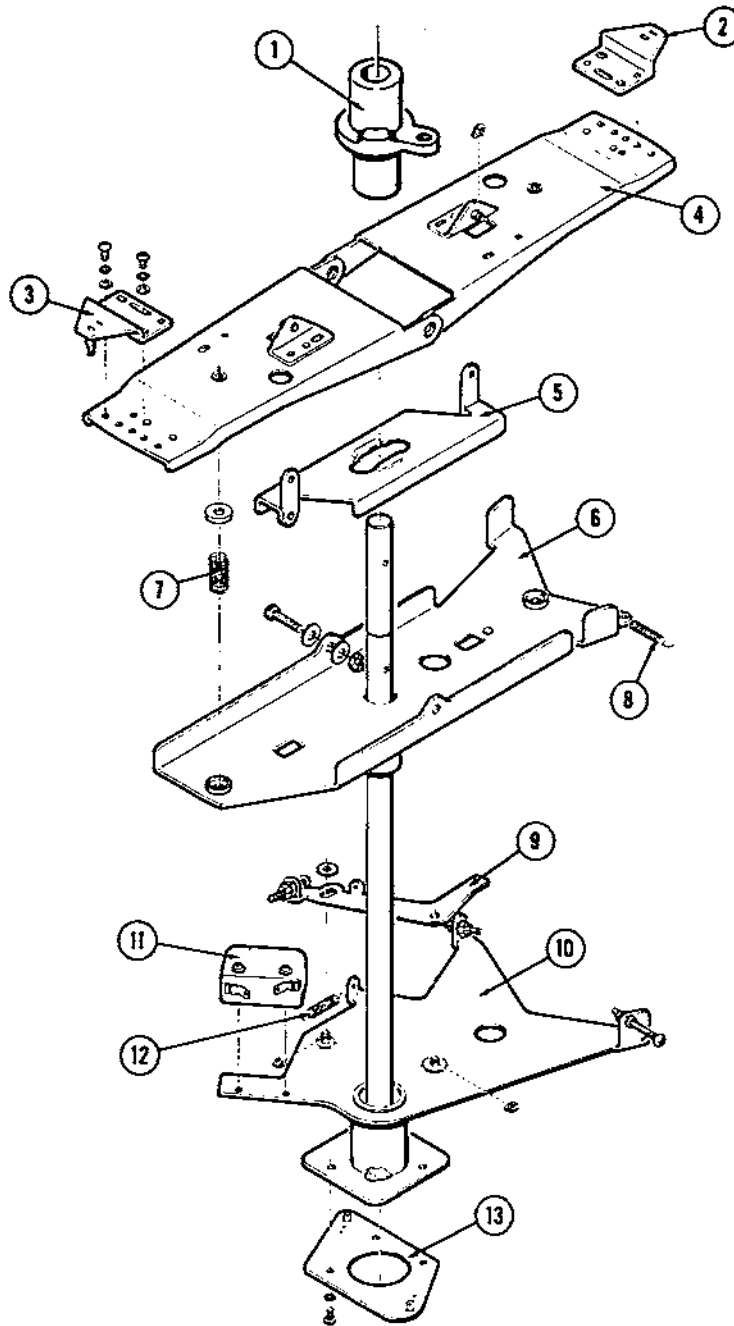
SELECTOR CRANK AND SHAFT ASSEMBLY
